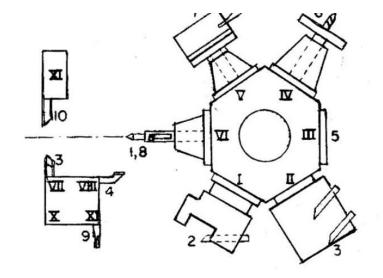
Tool layout for a typical job in single automatic lathe.
